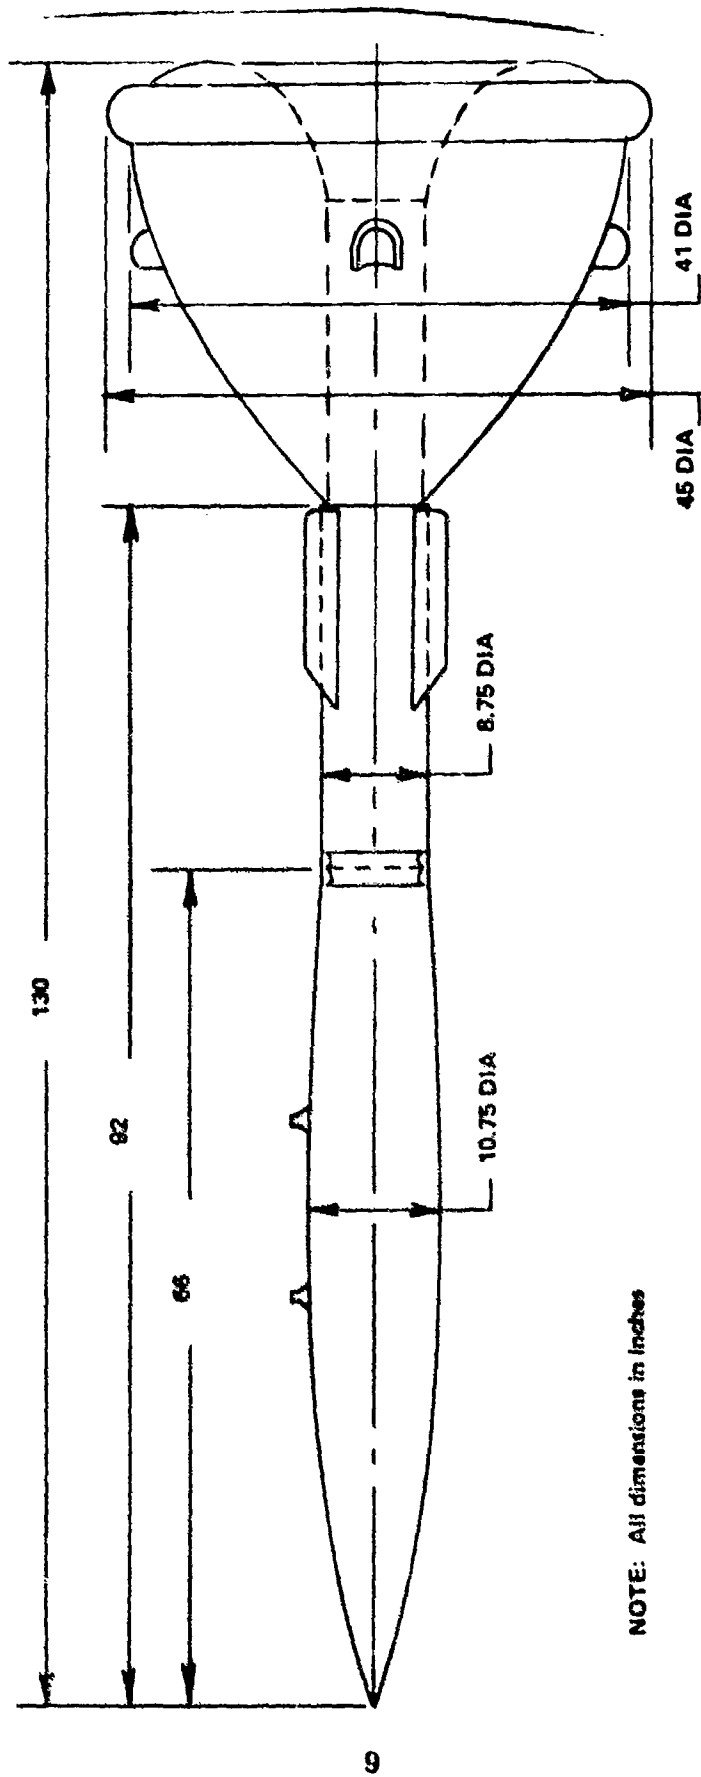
Dimensions of MK82 Bomb with Ballute Stowed
